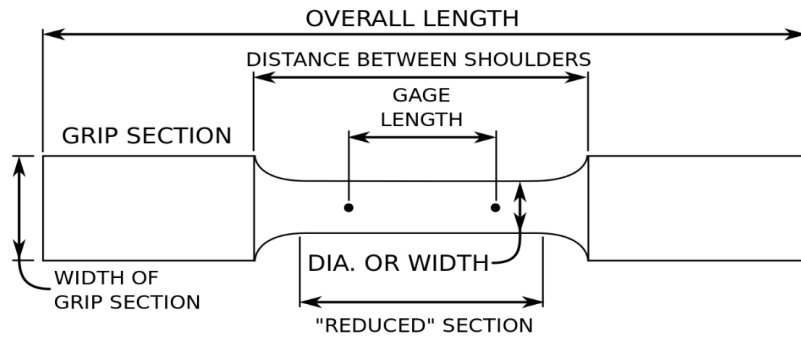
tensile test specimen standard dimension (Davis, 2004 and Jiru et al., 2022)
